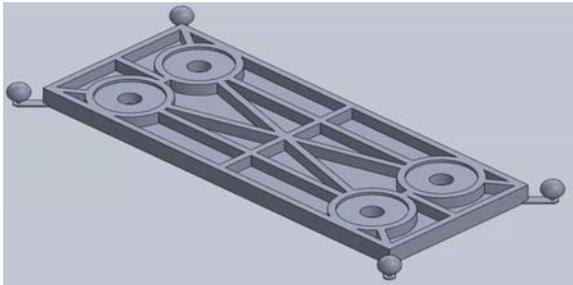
Lower platform complete with cutouts for wheel brackets and positional sensors mounted to corners
